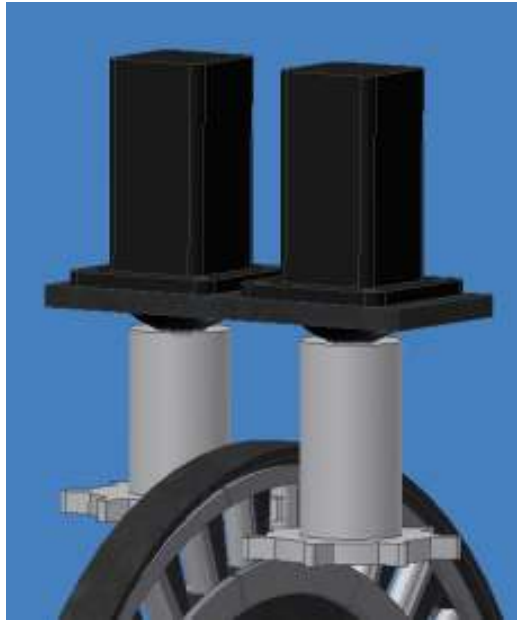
View of Motors and Hydraulic Shafts and Gear Mesh in Relation to Blade.
